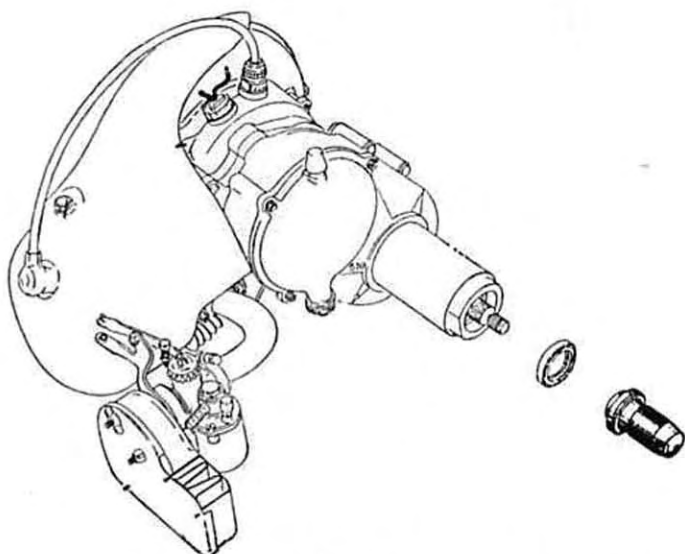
Rear Wheel Oil Seal Drift, Part No. 0018218.
